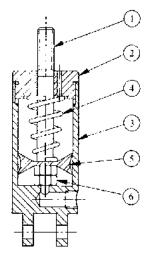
70076 (Rev. C) 1 1/4" Air Actuator Assembly
